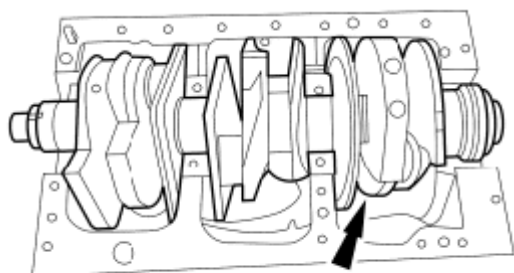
Identifying Crankshaft Main Bearings and Thrust Bearing
